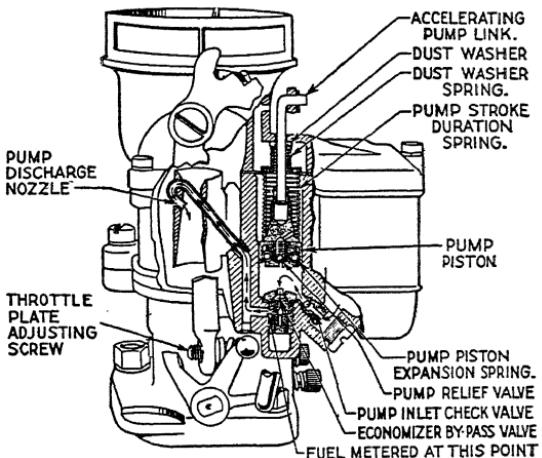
Accelerating Pump of Ford "V-8" Carburetor
